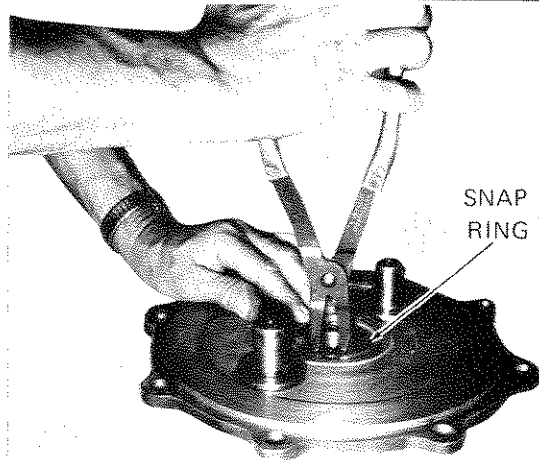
Installation of PTO Shaft Assembly — Lo-Speed (Sheet 1 of 4)
